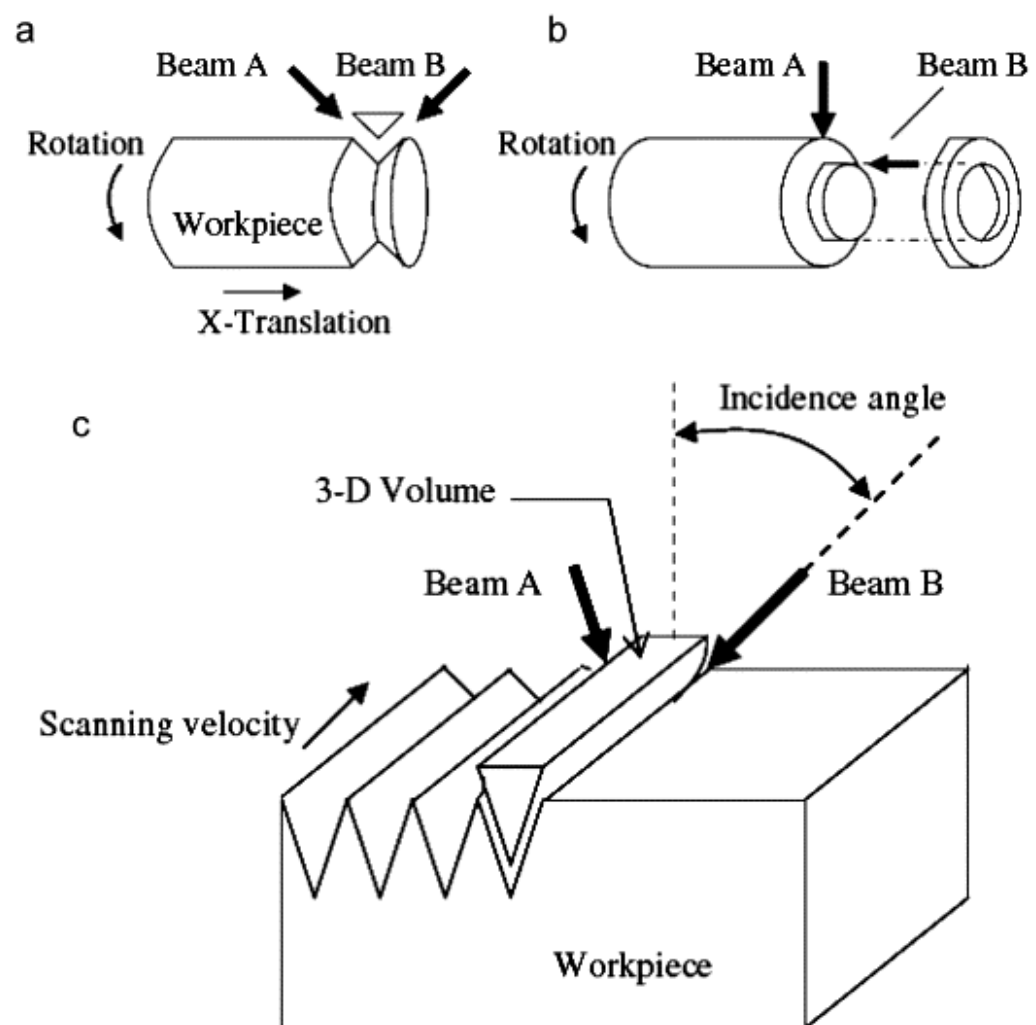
(a) Laser beam turning (helix) (b) laser beam turning (ring) (c) laser beam milling [42]
